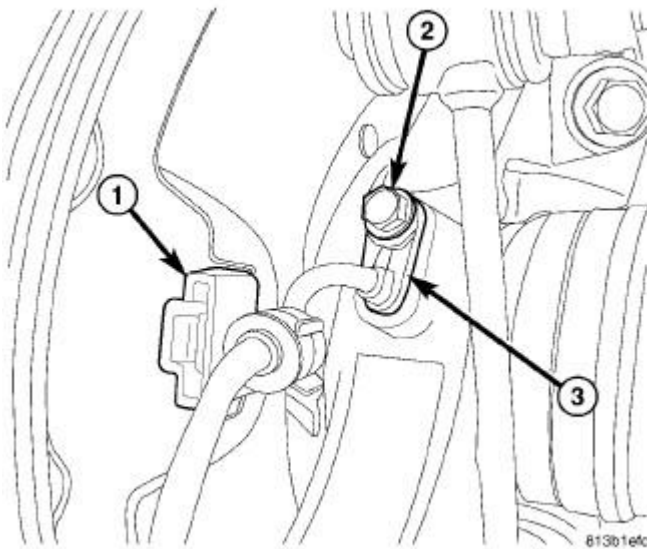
WHEEL SPEED SENSOR AT REAR KNUCKLE
